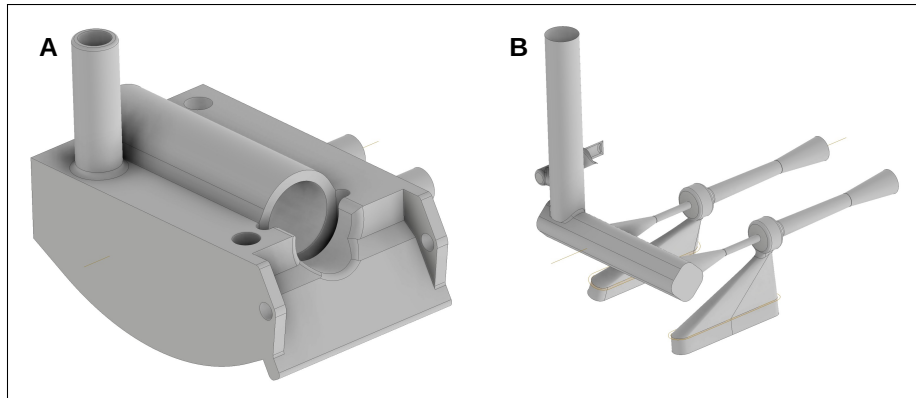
A) External view of a 3D-printed gripper prototype - B) Internal view of the pneumatic circuit within the gripper. This version incorporates two Venturi ejectors directly into the 3D-printed component. The performance of two 3D printed Venturi vacuum generator is evaluated in Appendix III
